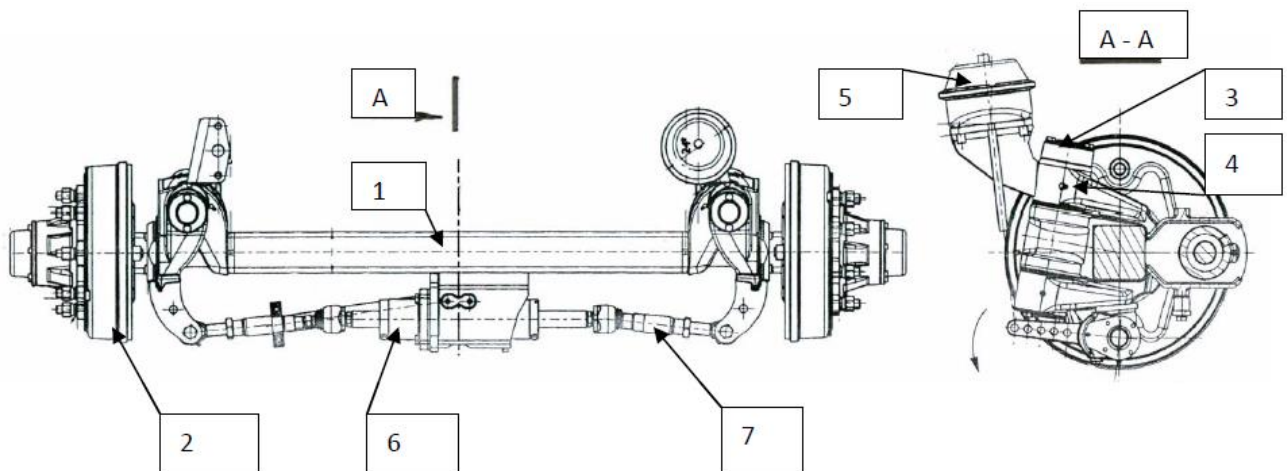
Diagram of a steering axle. 1 – axle; 2 – hub; 3 – hub turning axle; 4 – lubrication point; 5 – brake chamber; 6 – wheel locking hydraulic cylinder; 7 – adjustment rod.
